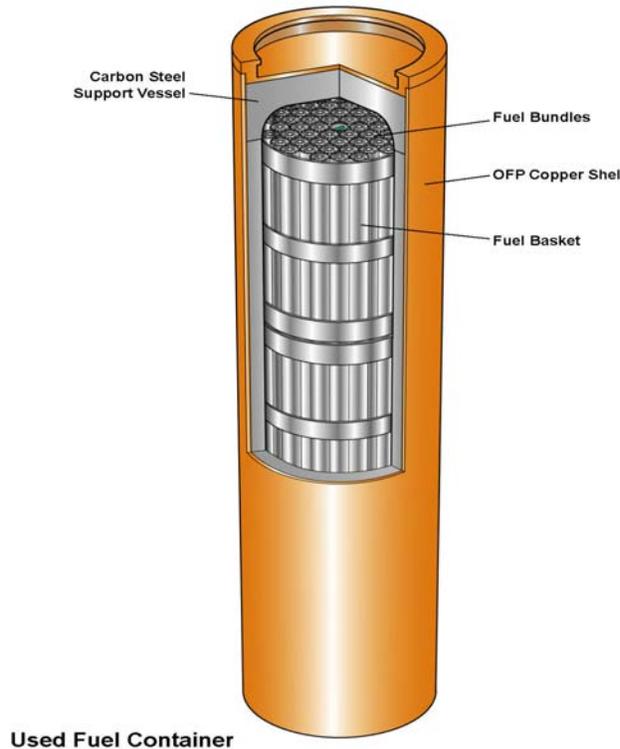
Conceptual Used Fuel Container Design for 324 Used Fuel Bundles Comprising a Carbon Steel Support Vessel and Outer OFP Copper Corrosion Barrier (after Maak and Simmons 2001)
